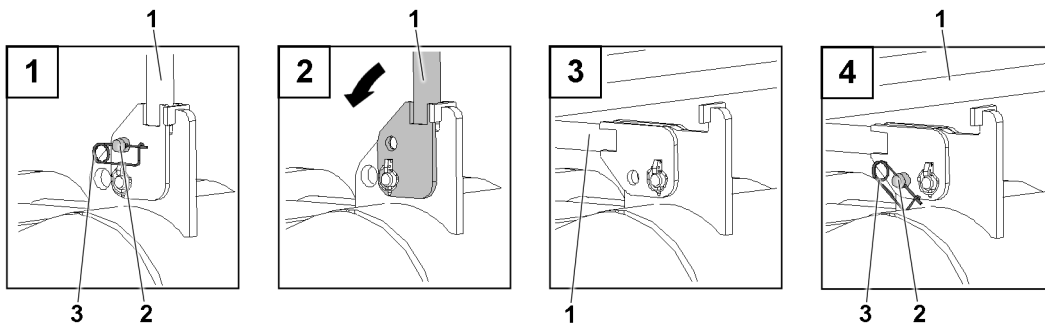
Fall protection equipment on the boom pivot sections and on the lattice sections — assembling the railing in the transport position
